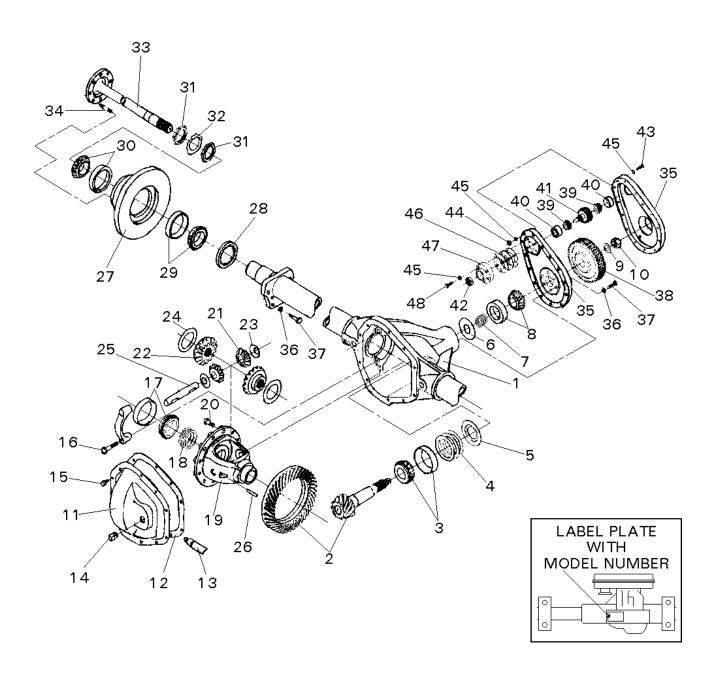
Dana Drive Axle and Reduction Gear Assembly
